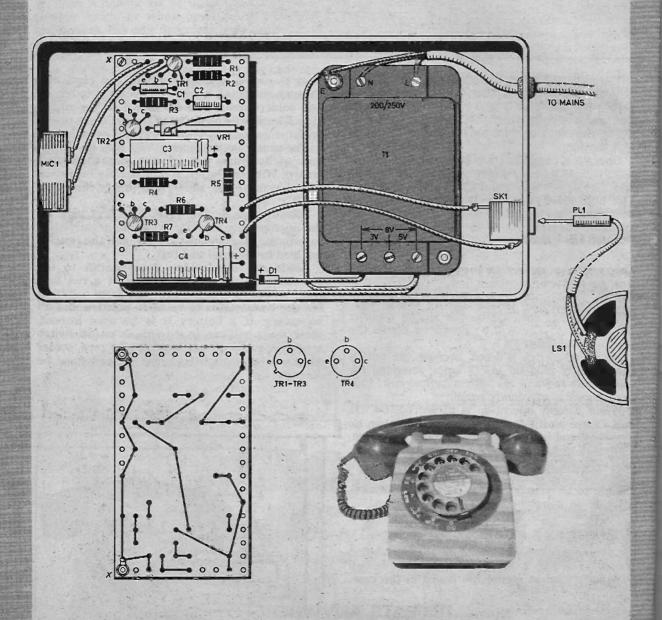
Layout and wiring of the circuit board and complete Phone Bell Repeater.
